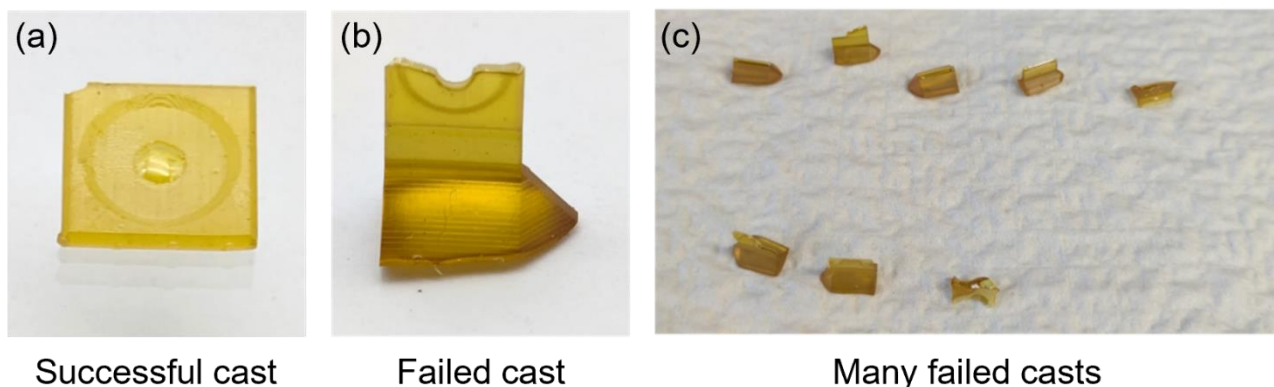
(a) A successful cast using one part mould. (b) A close up example of a failed cast. (c) many failed casts using one part mould.
